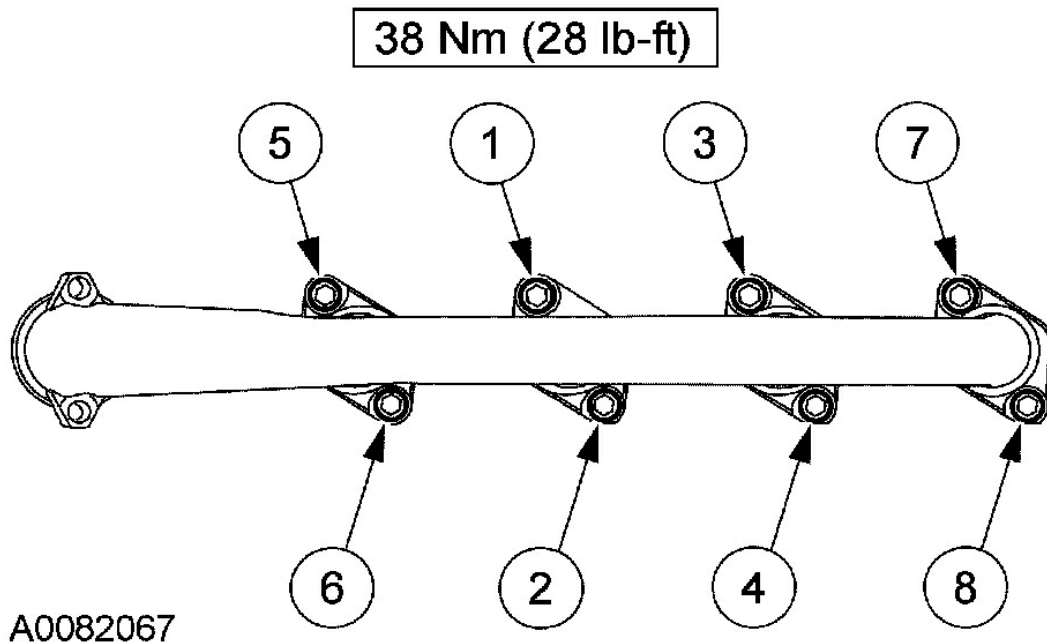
Identifying LH Exhaust Manifold Bolt Tightening Sequence With Torque Specification
